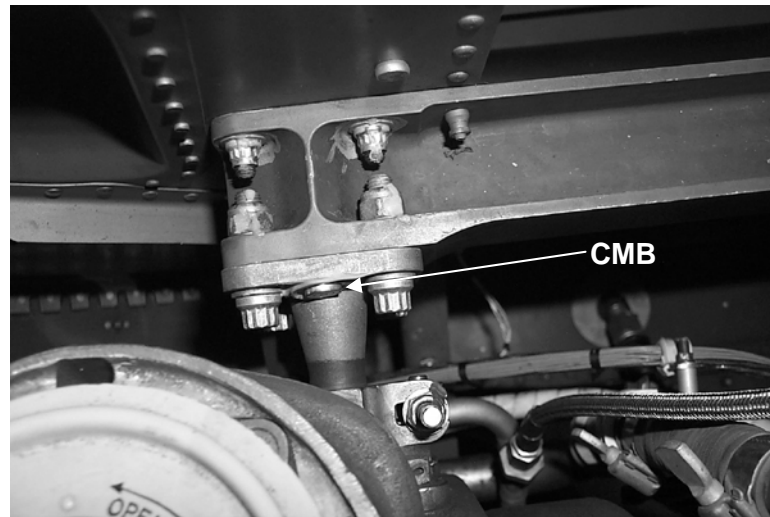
Forward Inboard Engine Mount (AH-64A/D) with CMB Installed
